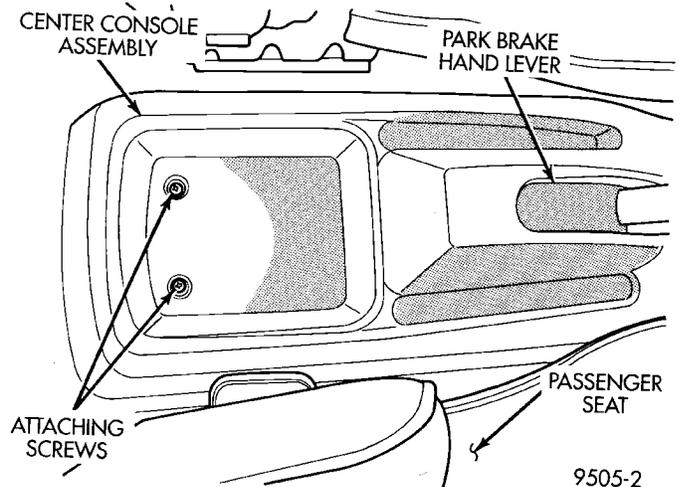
Attaching Screws At Rear Of Center Console With/Without Arm Rest
